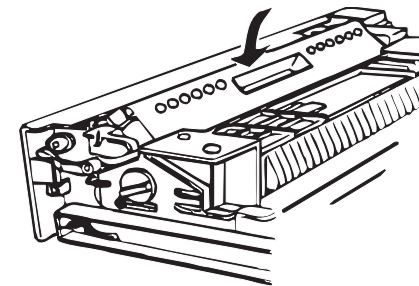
OIL ROLL ASSEMBLY Replacement 3
